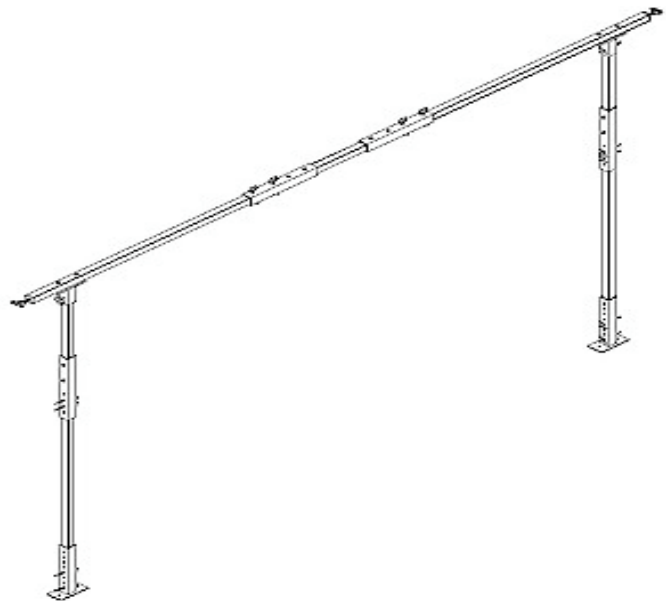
Header Layout with Center Header and Both Uprights
